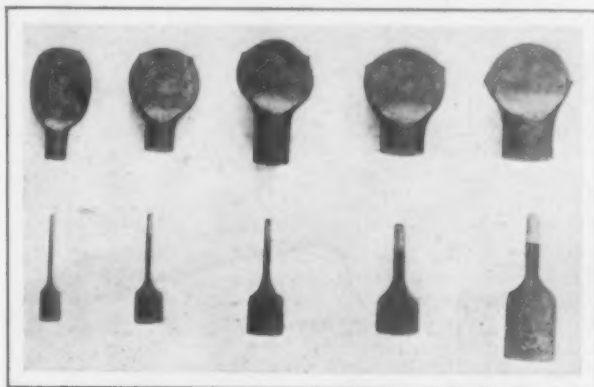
View Showing Some of the Squeezing Work Accomplished Between the Grip Dies of the 4-in. Machine
